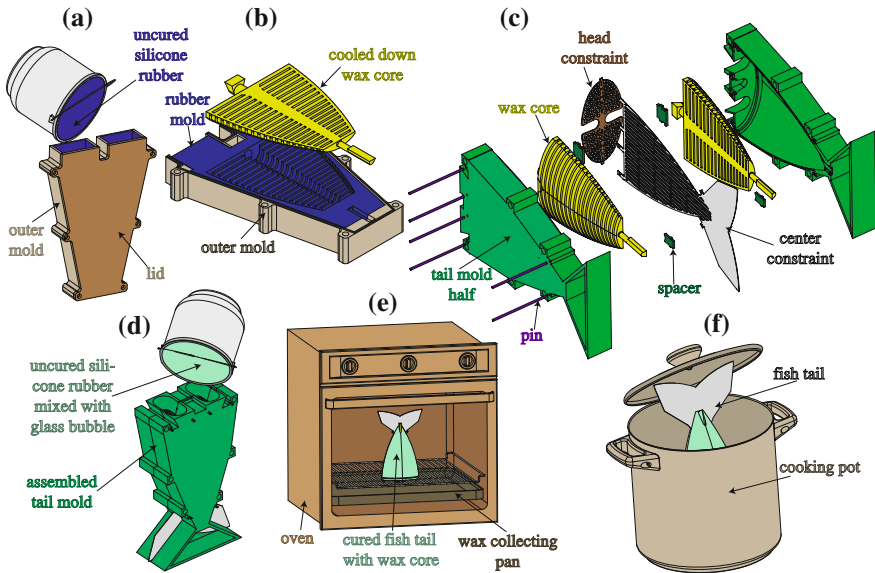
Fish tail fabrication process: a Pour and cure a rubber mold, b pour wax cores, c combine head constraint, center constraint and wax cores with tail mold halves, d pour rubber mixed with glass bubbles into assembled tail mold, e using an oven melt out wax core from the cured fish tail, and f cook out remaining wax to create desired actuator cavities
